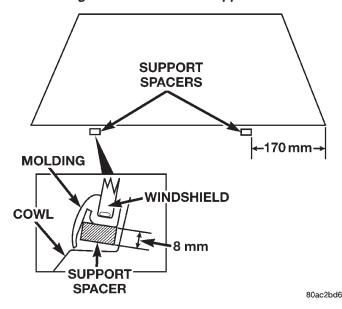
Windshield Bottom Support Spacers molding to the windshield during the installation procedure.
